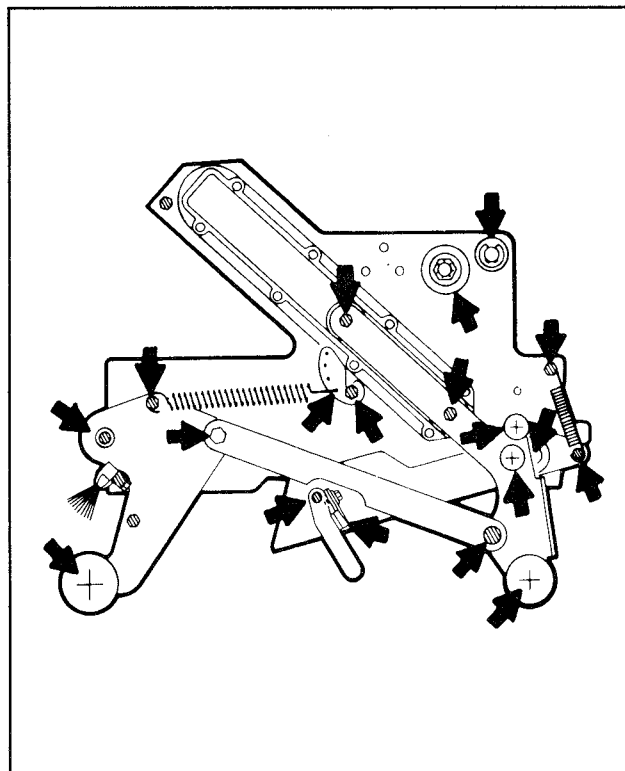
Lubrication Points - Top And Bottom Taping Heads
